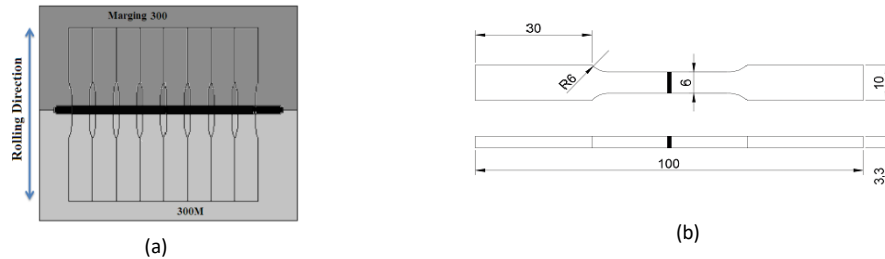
(a) Cuts of specimens in the welded plate and (b) tensile specimens final dimensions (mm).
